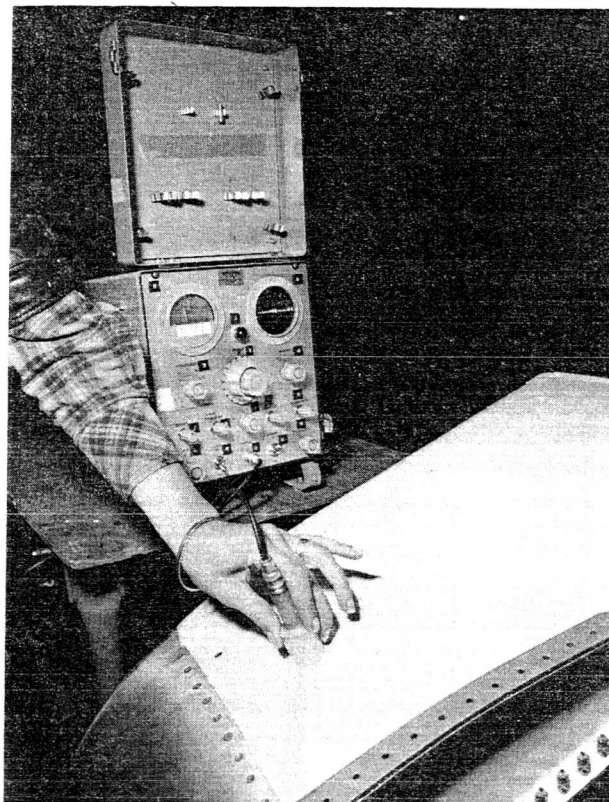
Fokker Bond Tester Inspection of Repair to Skin Panel
